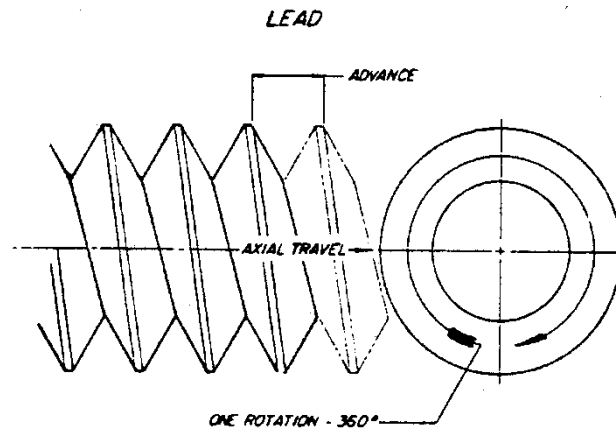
Screw Thread Lead (Ref: DI6-072 rev. 10, Original source unknown)
